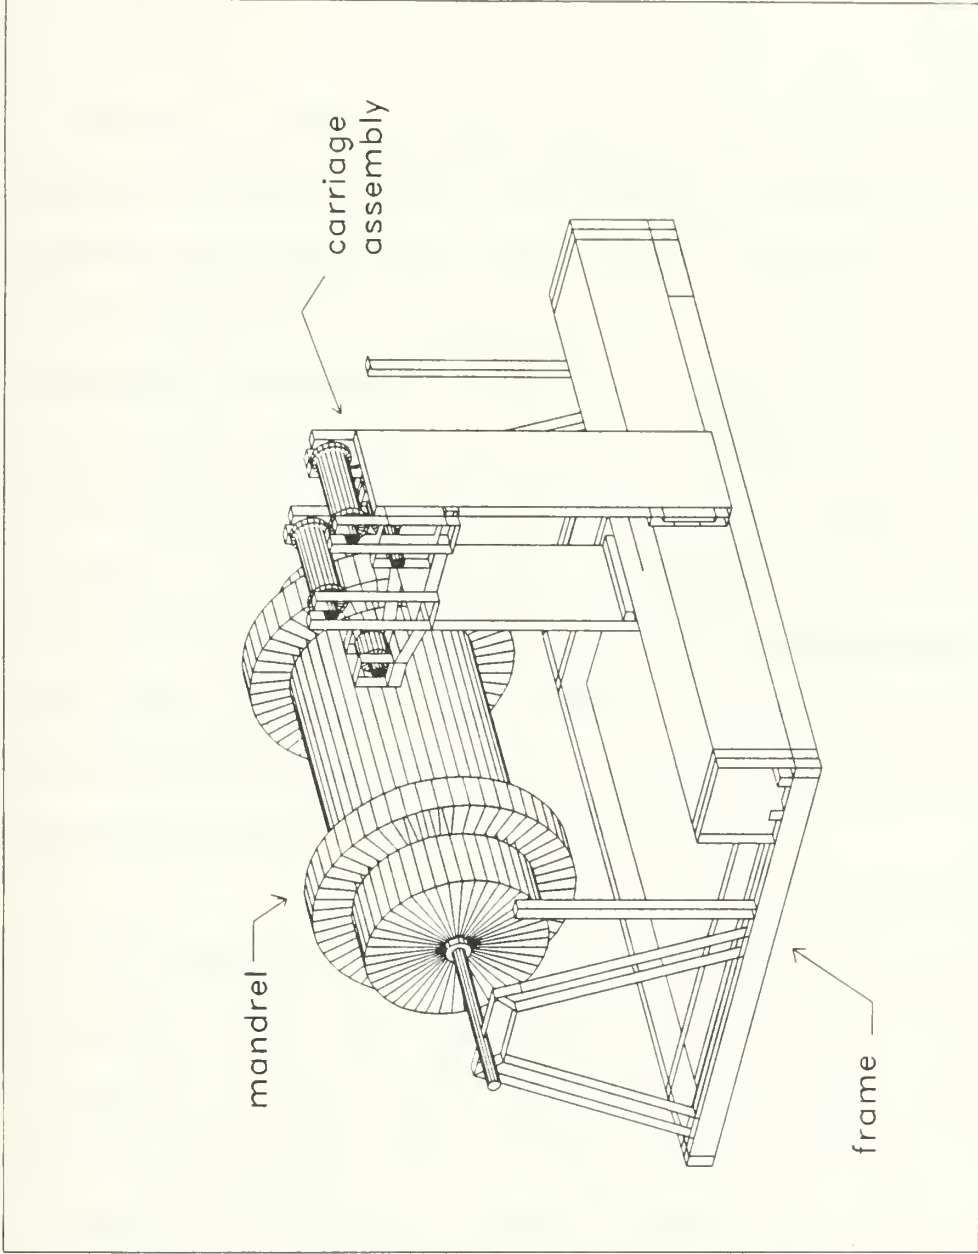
Filament Winding Machine (Three Dimensional View)
